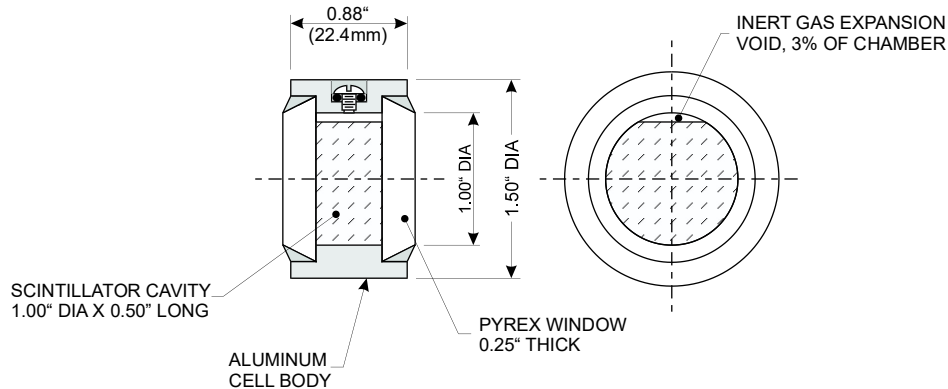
Engineering drawing of the EJ-309 scintillator used for the target cell in STOF.
